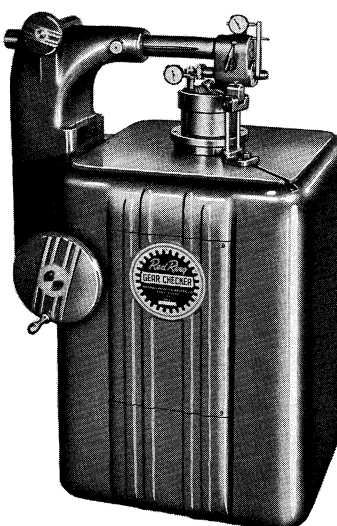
The Model SIG internal gear checker that checks spacing, size or eccentricity.
